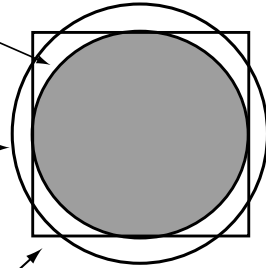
Footprint - 3 mils stencil - solder mask defined
